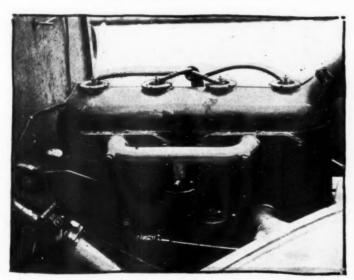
Intake side of the Swiss slide-valve engine with mounting of carbureter and T-shaped manifold
